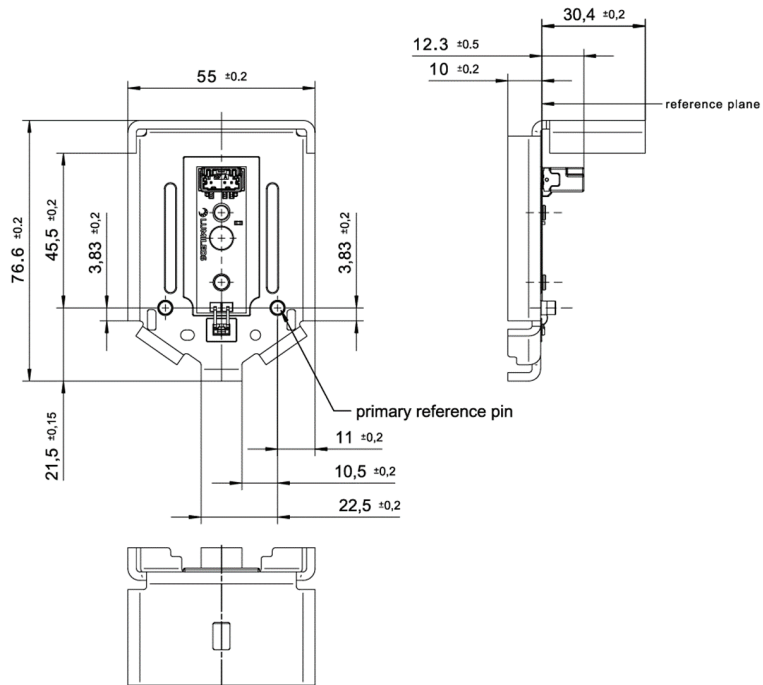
Mechanical dimensions in mm of the LUXEON Go 1x4 slave module with heatsink type A
